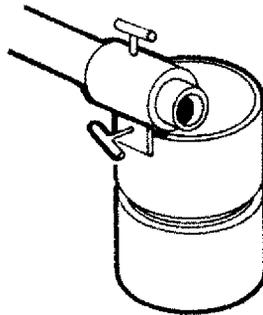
Method of clamping pipe nipples in pipe stand for welding in the horizontal position.
